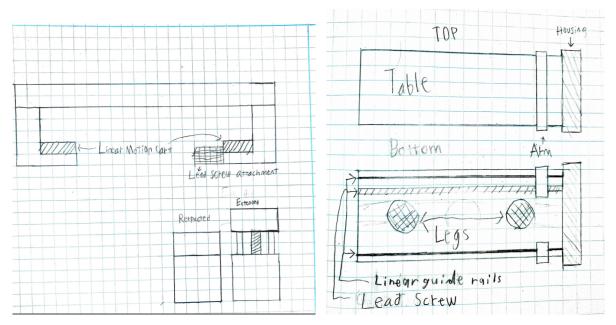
Physical design sketches; Arm Assembly (left) and Arm Mounted to Table (right)
